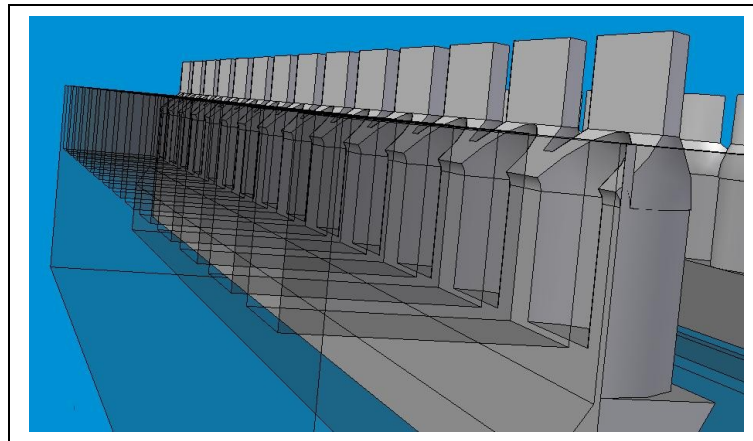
Chip pit fencing (grey) which allowed detailed casting profiling
